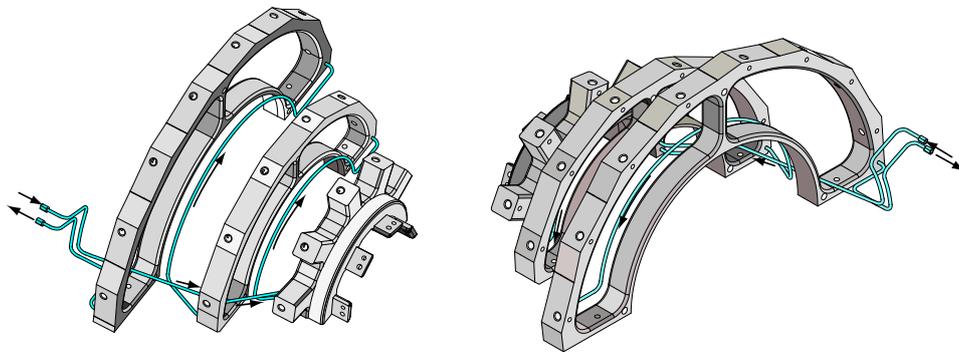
The brazing of end-rings and CO₂ cooling tubes shown in the front and rear views.
